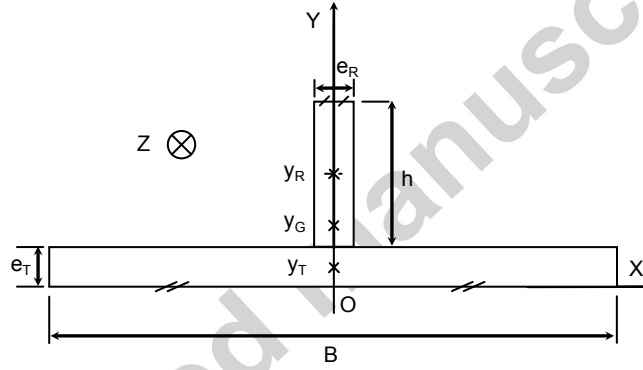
Geometrical parameters of the assembly's cross-section (stiffener and plate).
